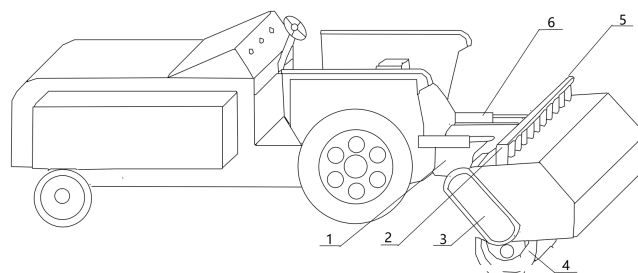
Self-propelled fine rotary soil flame insecticide. 1. Transfer case parts; 2. Rotary drum parts; 3. Sprocket box parts; 4. Rotary tiller drum parts; 5. Flamethrower parts; 6. Hydraulic parts
